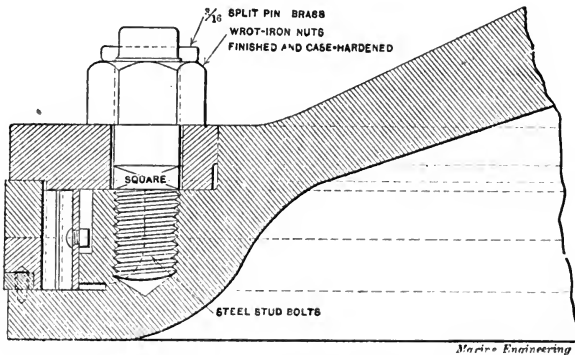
Marine Piston, Enlarged View, Showing Packing Rings and Follower Plate.
